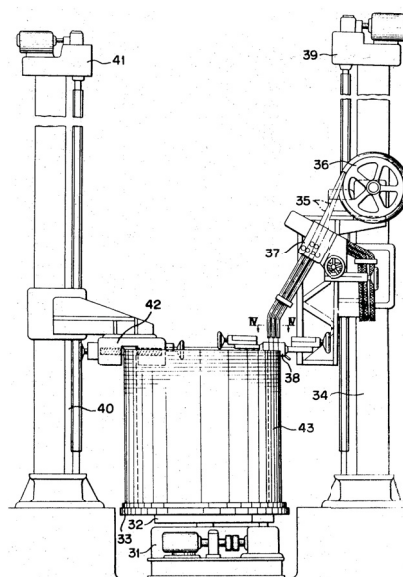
Method of and apparatus for constructing substantially circular cross-section vessel by welding patented by A. Ujiie [20].
